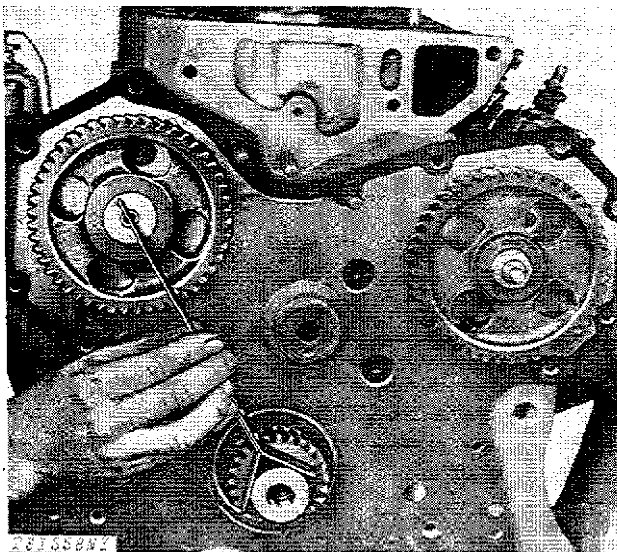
Timing the Camshaft Gear with JD254 Tool
